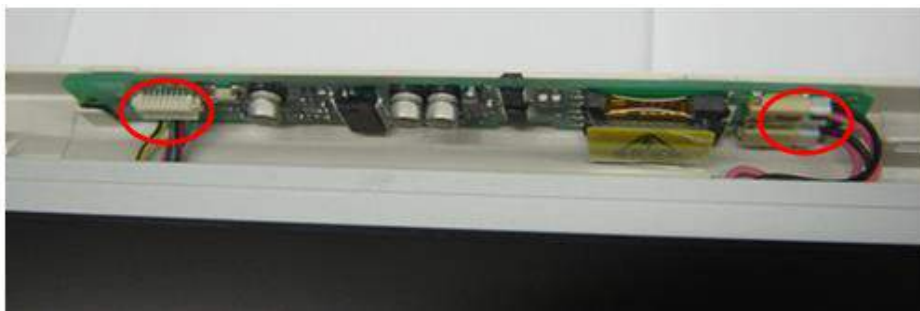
Disassemble the Backlight Inverter Board of Display
